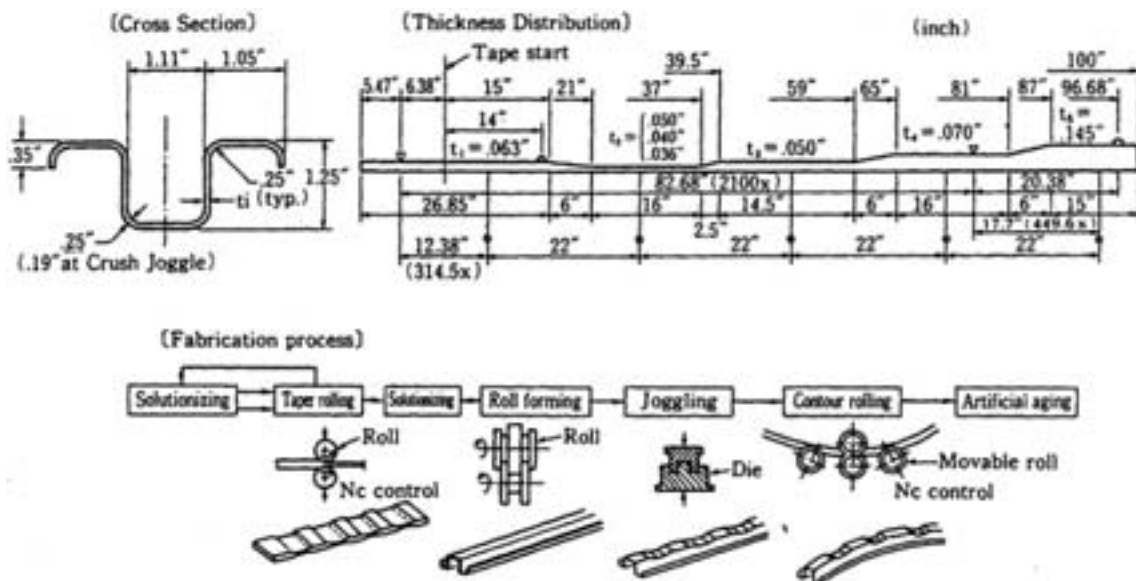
Shape and dimension of taper-rolled stringer and its manufacturing process⁴⁴⁾.
